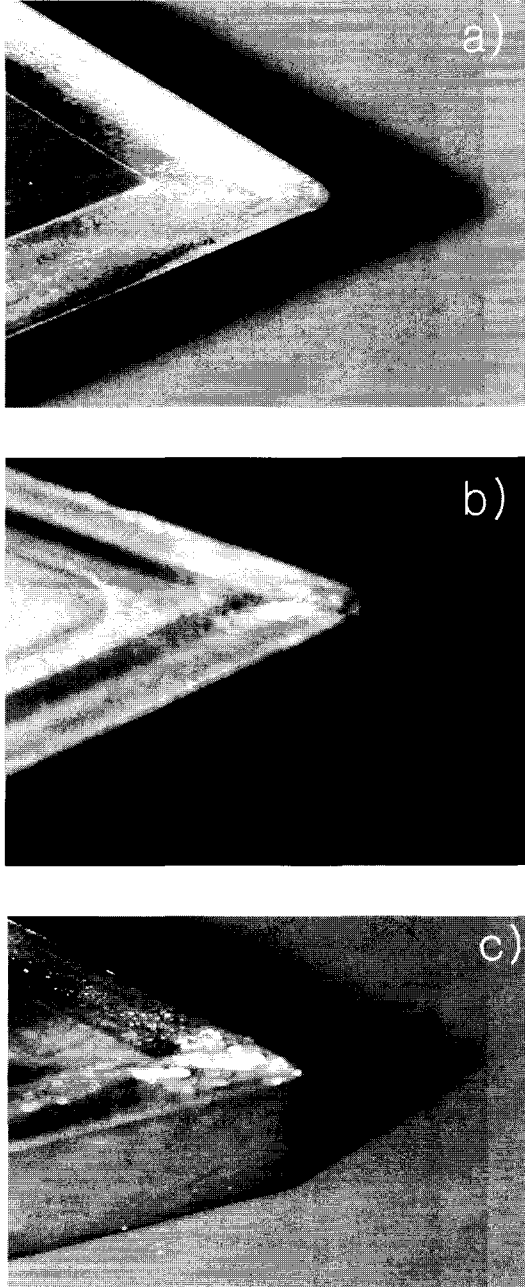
Optical photographs of Crater wear plane in cutting tools with 20K $\mu$ m cutting length (10 $\mu$ m, cutting material: Aluminium 6061 alloy)
